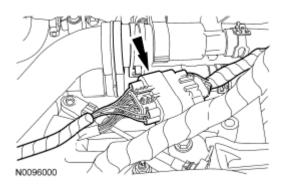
Locating Engine Wiring Harness Electrical Connector Courtesy of FORD MOTOR CO.
